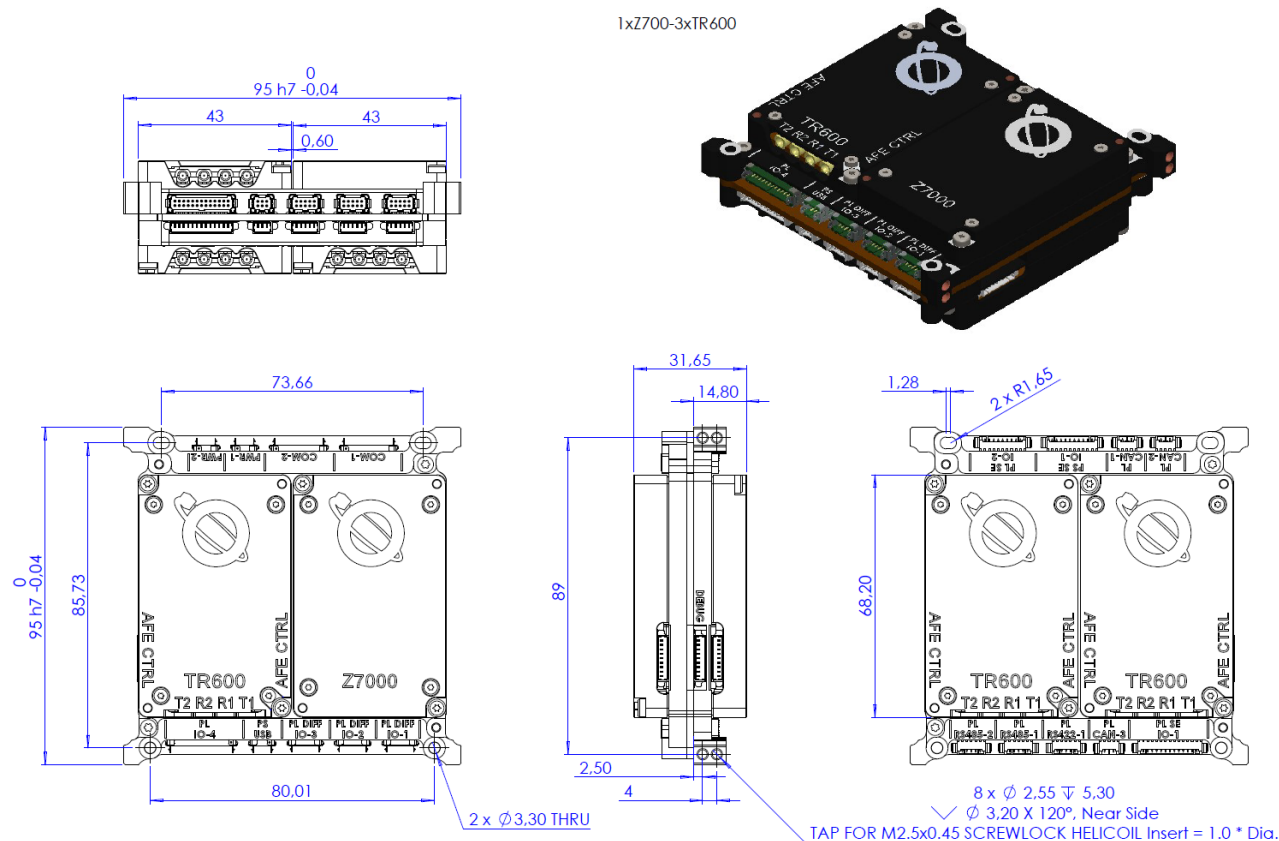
NanoCom SDR MK3 with 3xTR600 mechanical drawing (all dimensions are in mm)
